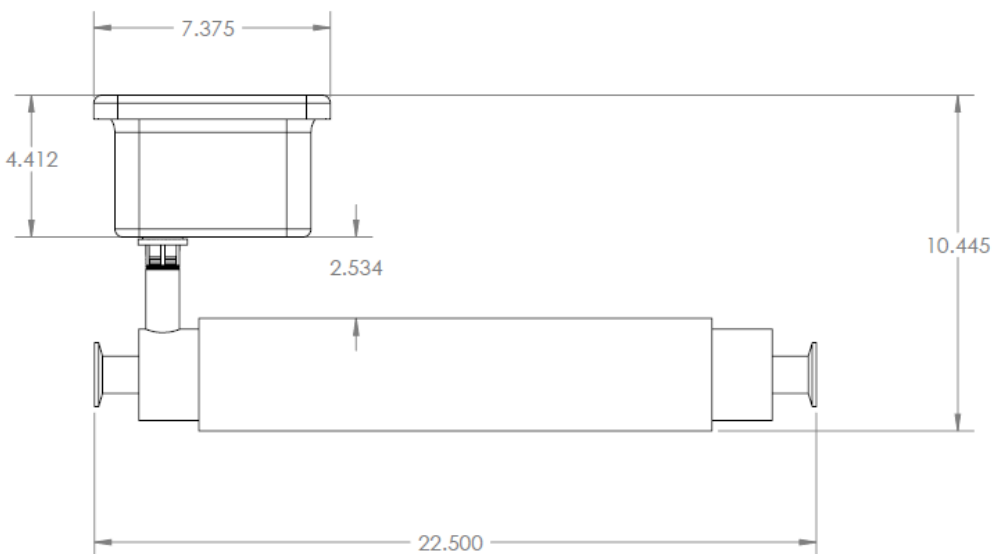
DENSITRAK 1AA0/SVT - SIDE VIEW - DIMENSIONS
